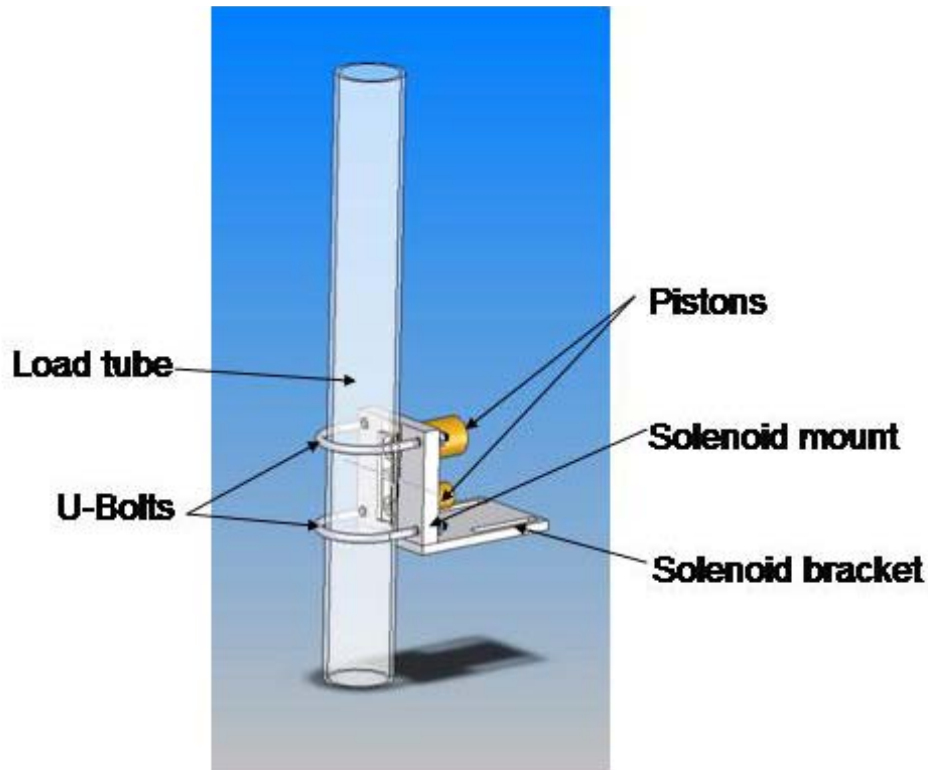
Solid Works model of the loading mechanism which is able to hold up to 16 standard pool balls and can be adapted for the use of various sized projectiles.
